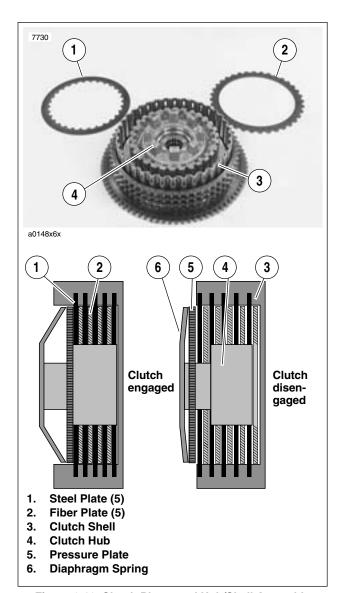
Clutch Plates and Hub/Shell Assembly
